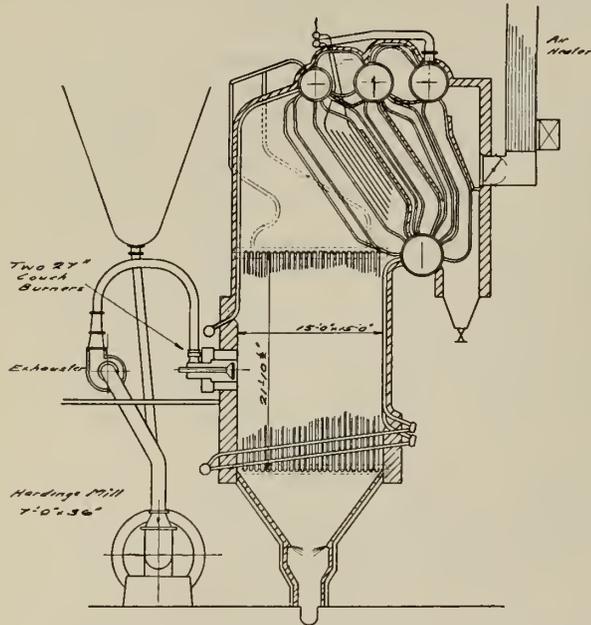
900-h.p. Stirling Boiler, Seaboard Power Plant.
